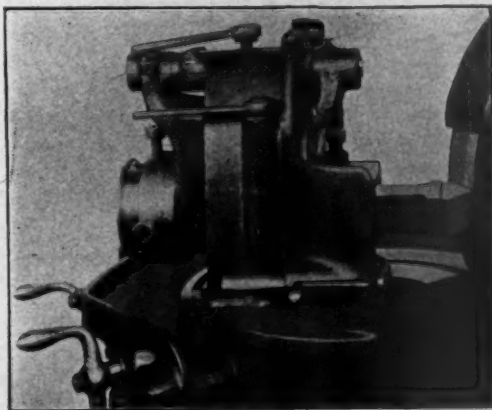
GRINDING THE LEFT SIDE FACE OF A LARGE V TOOL.
